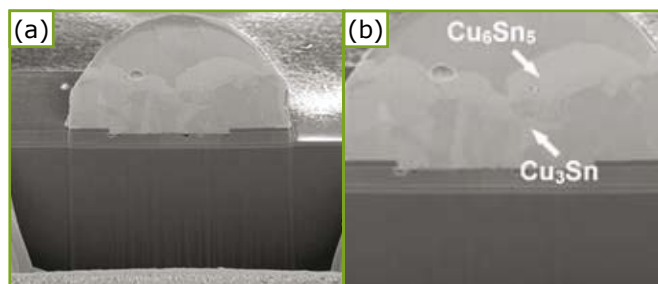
FIB pictures of Cu/Sn solder microbumps on the Si chip.
